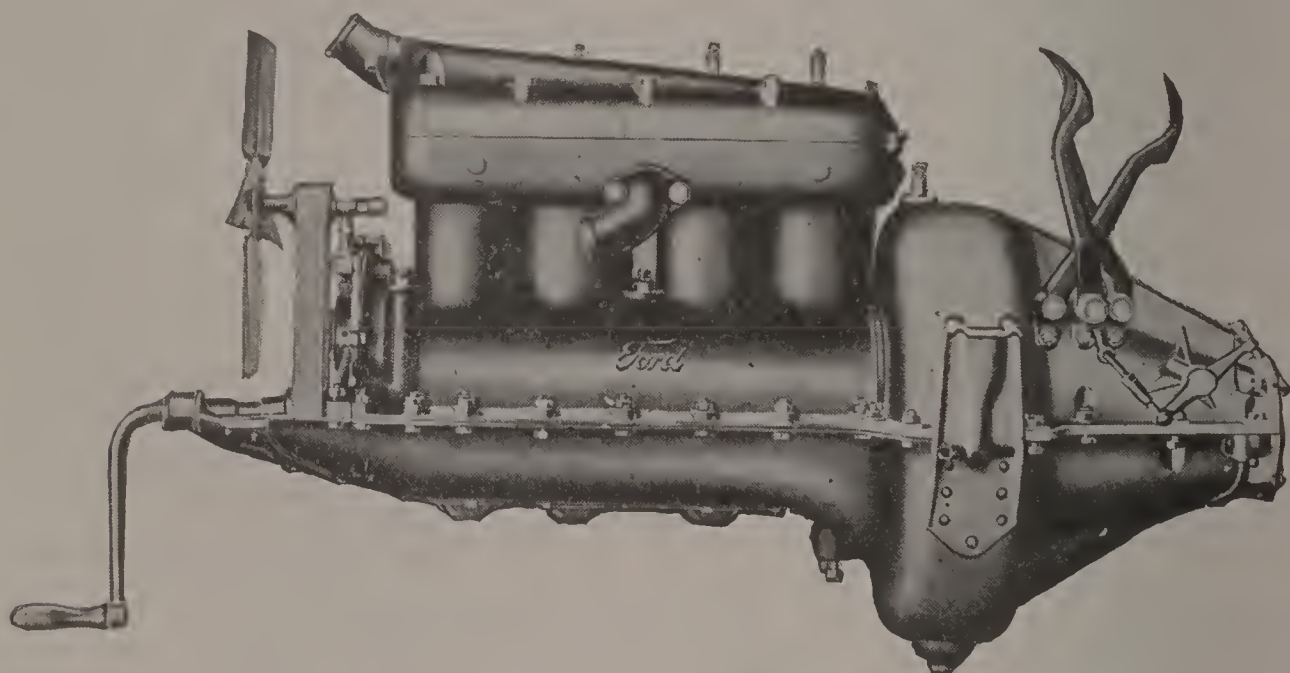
Ford Engine with Cylinders, Crankcase, and Gearbox in Two Parts
